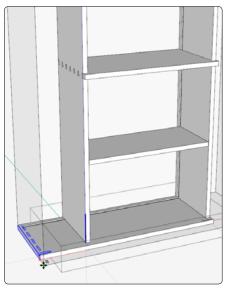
Select the upper end of the side component, including the dovetail joinery, and use the Move/Copy Tool to raise the height of the side to the bounding box.
